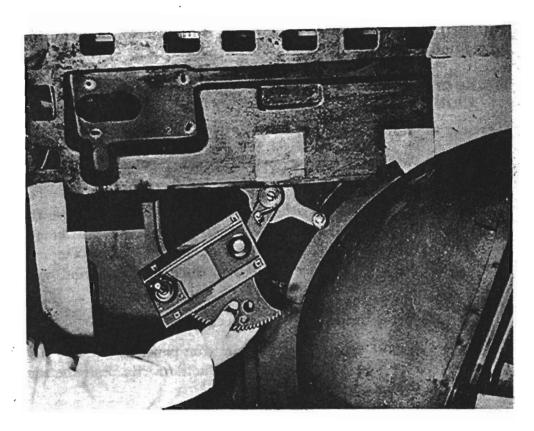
Pull the Regulator Assembly Out Through the Access Opening in the Inner Panel.
